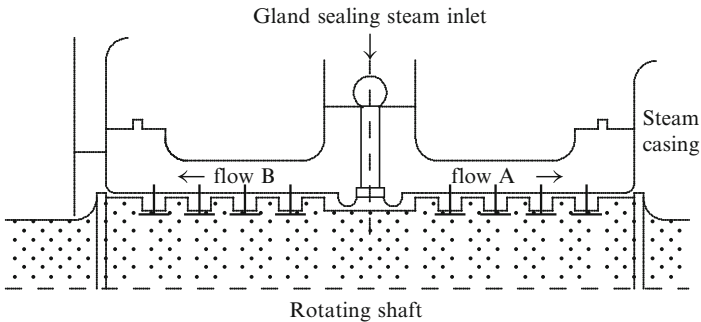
Turbine shaft gland seals (courtesy of Millmerran Operating Company, Australia)
